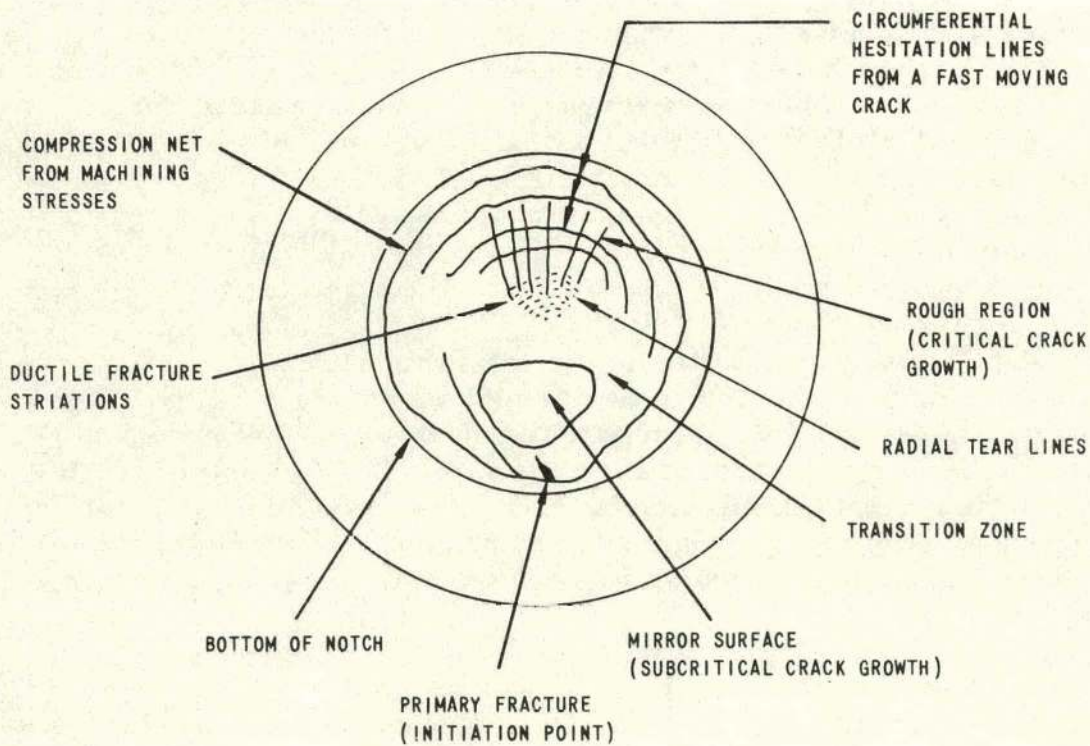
Morphological Pattern of the Fracture Surface Shown in Figure 22: a Normal Non-Metallic Brittle Fracture Is Shown
